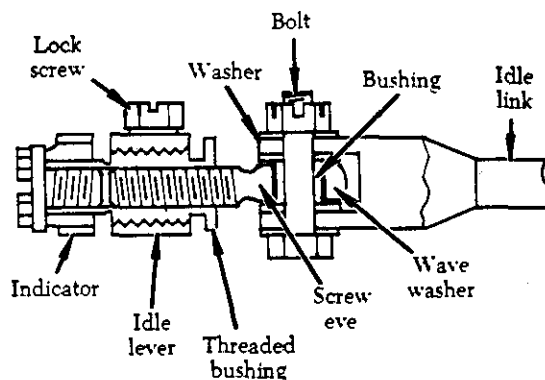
Idle mixture adjusting mechanism for Stromberg injection carburetors.
